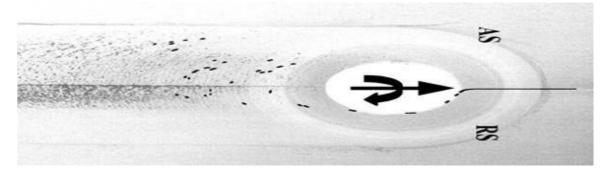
Advance and Retreating sides for weldment [16].
